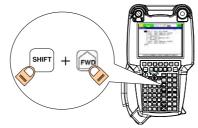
(c) Continuous Operation of Weld Program
